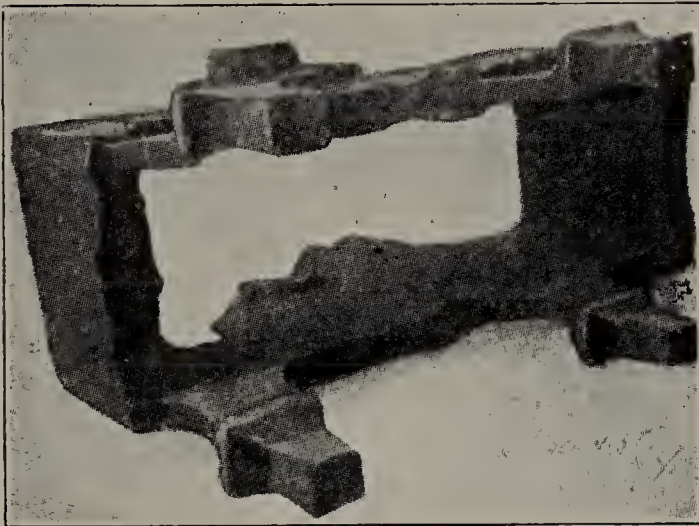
STEEL CASTING AS IT LEFT THE MOLD
